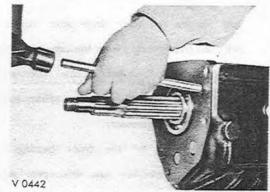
Removing the gear shift fork shaft from the transmission case.
